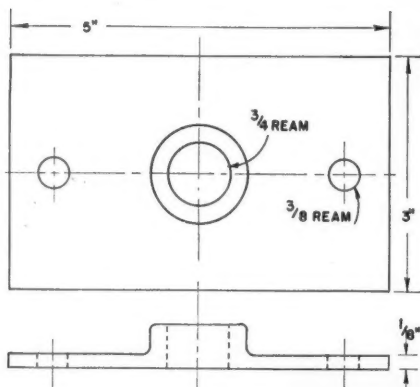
Drawing of a Steel Stamping of the Type which can be Machined in Jig Shown in Fig. 2.
